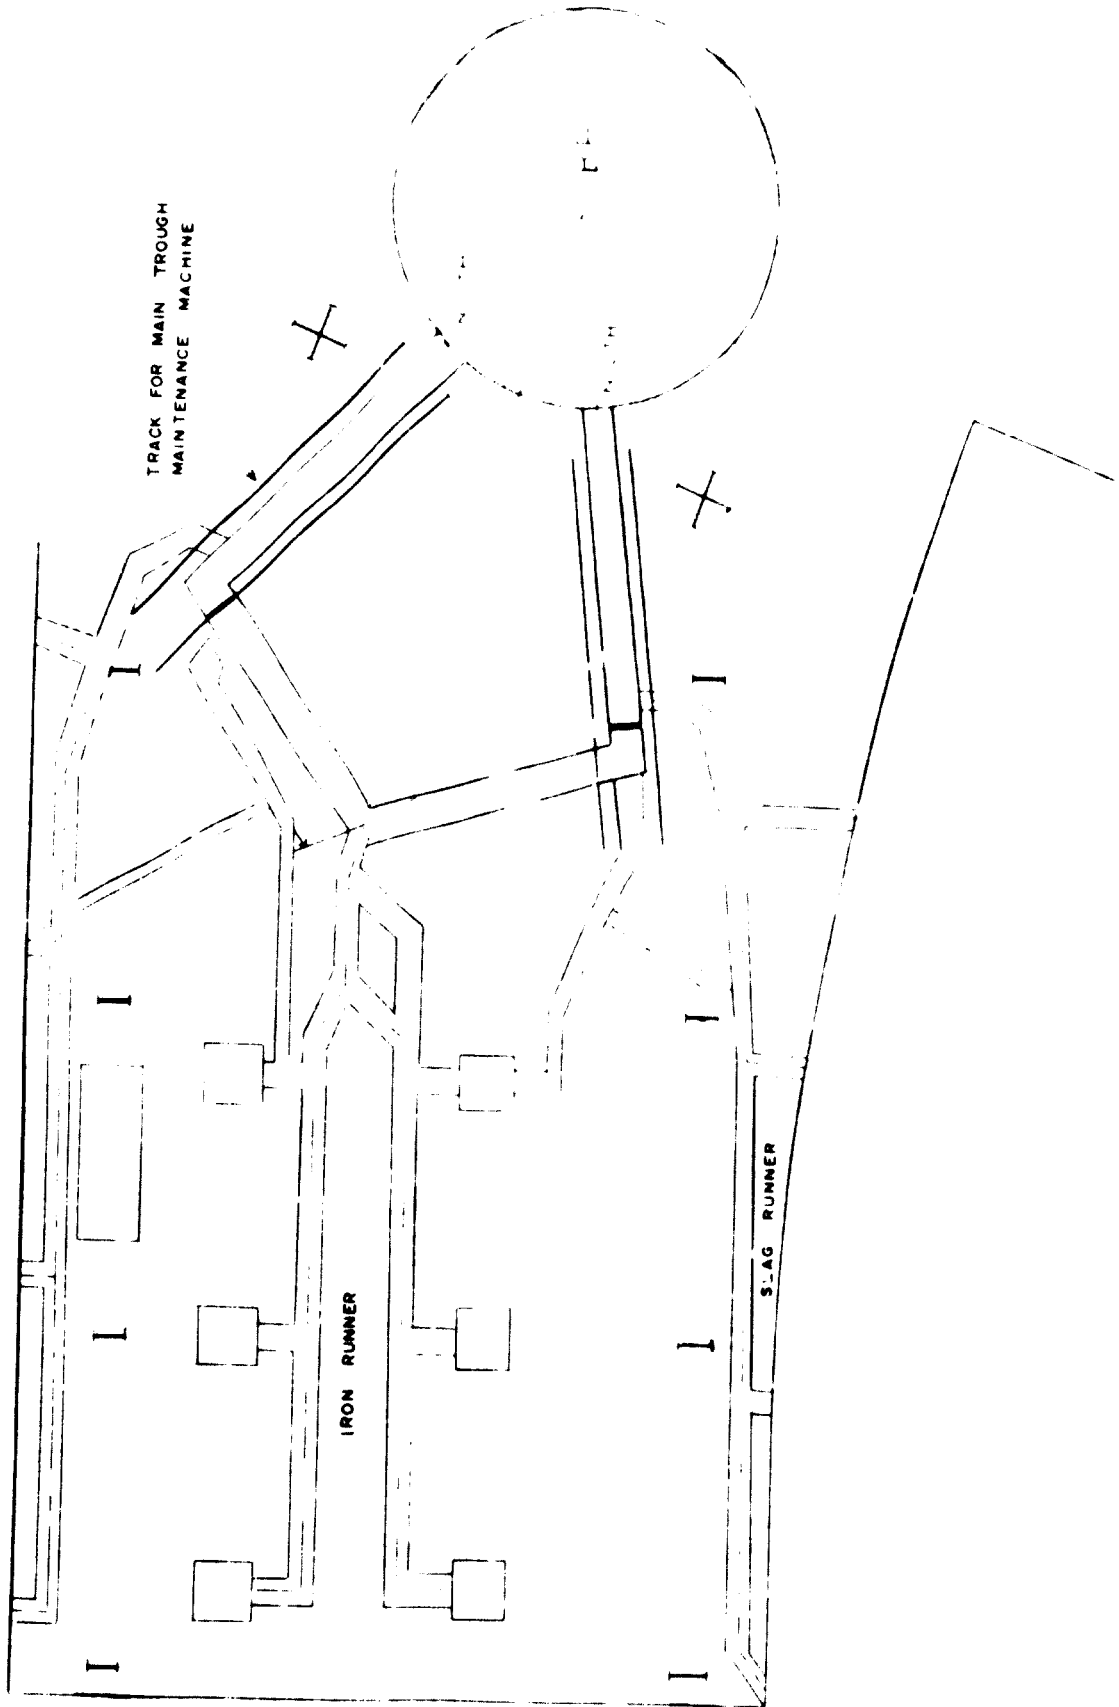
TYPICAL CAST HOUSE WITH TWO TOP HOLES.
